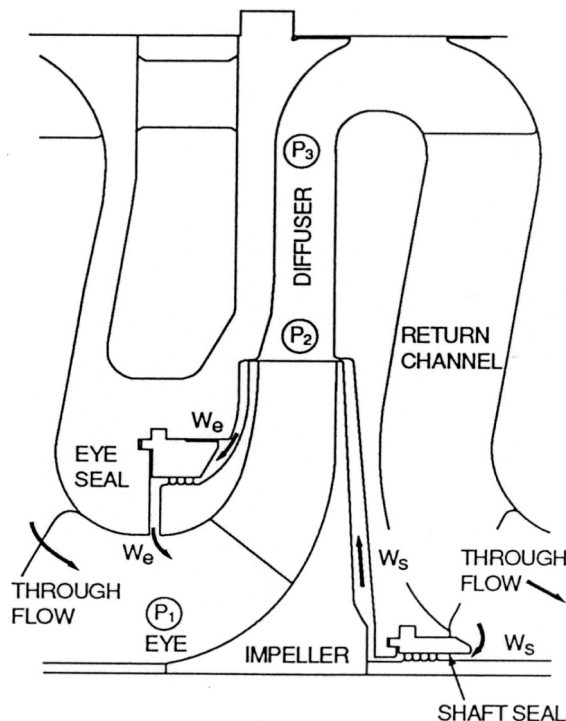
Centrifugal Compressor Abradable Seal Locations (A).
